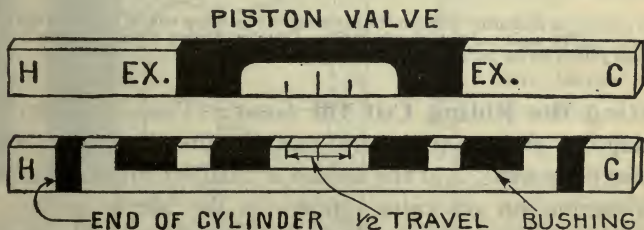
and 825.—Inside admission piston valve battens. They are especially useful to check the valve setting. The ends of the cylinder should be indicated on the seat battens in addition to the bushings.
